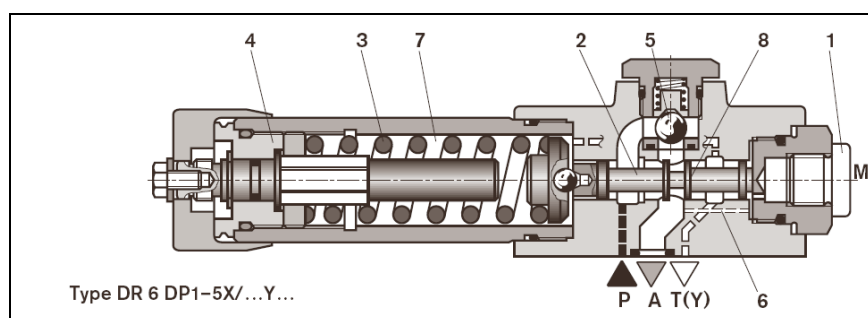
Pressure reducing valve DR 6 DP Bosch Rexroth.
